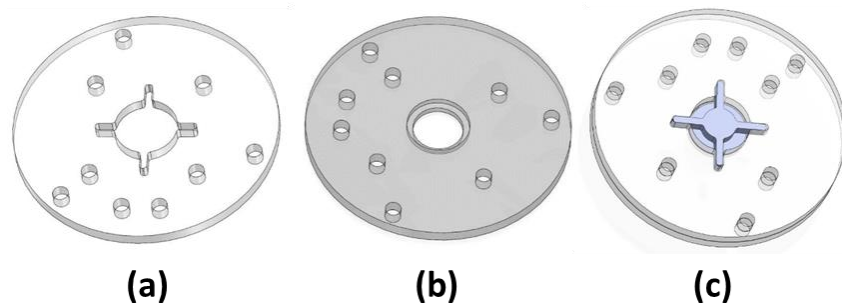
Thermionic convertor design, (a) top quartz holder; (b) bottom quartz holder; (c) assembly with molybdenum emitter and collector
